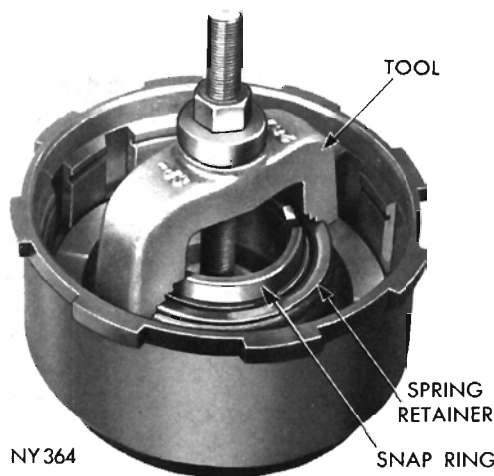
Removing or Installing Front Clutch Retainer Snap Ring (A-904)
